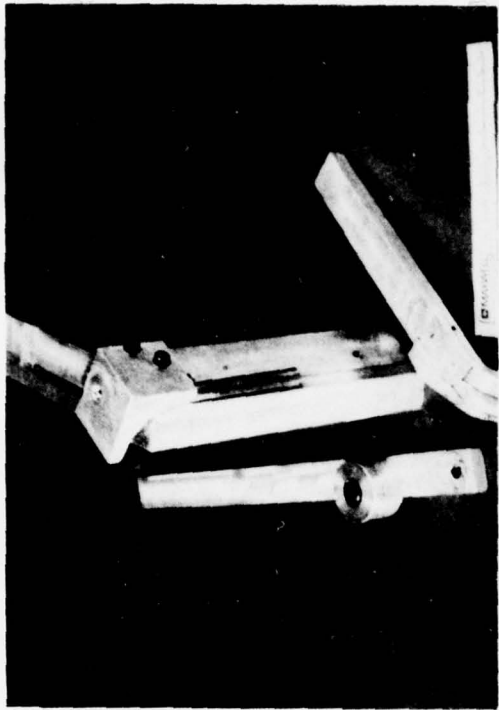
A shows two adjacent formed tubes with a heat transfer wedge block in place. The same tooling was used to produce offset connections where higher heat transfer rates may require closer spacing of the tubes. The cooling tubes formed to meet this requirement are shown in Figure C.14B. The flattened straight sections of the tubes were formed with the special two-piece forming die shown in Figure C.15A with a piece of tube before flattening. The resulting tube cross section after flattening is shown in Figure C.15B.
